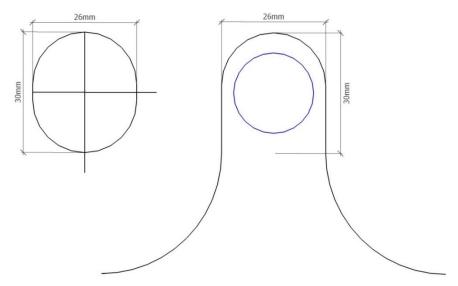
Slotted hole dimensions and V-shape due to fabrication tolerances
